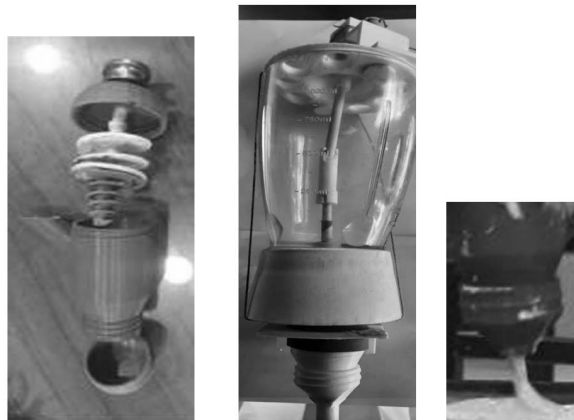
Dispenser-cum-extrusion unit before assembly, depicting all component hardware.
